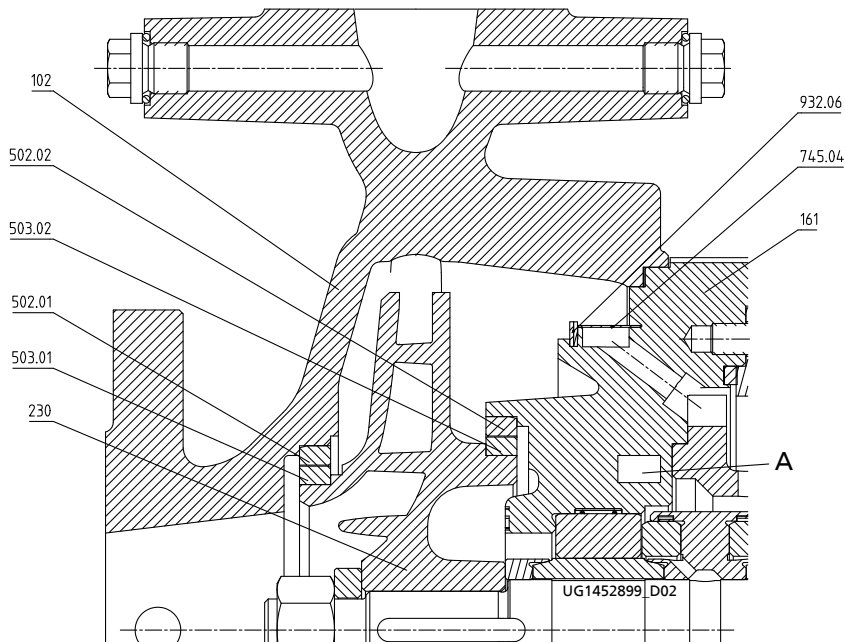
Model with volute casing and ring filter, heating chamber, casing wear ring and impeller wear ring
